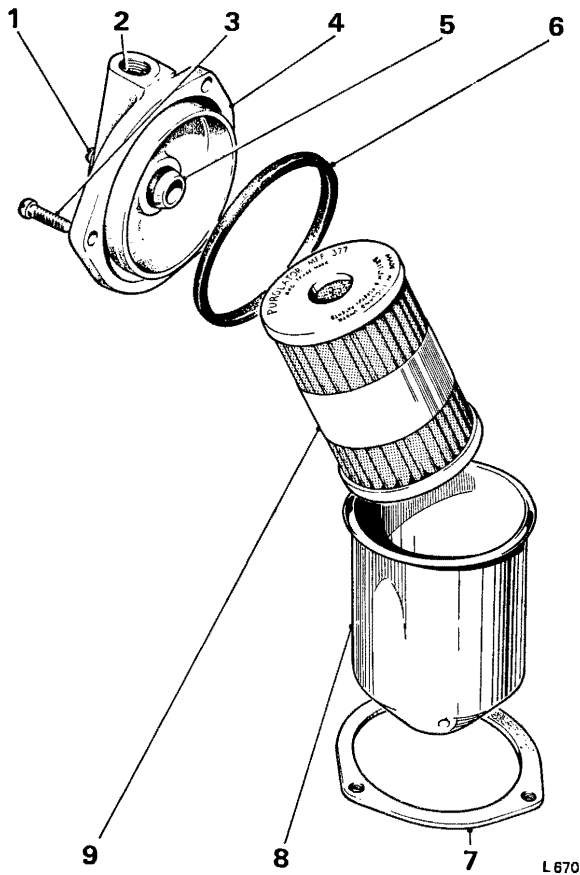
EXPLODED VIEW OF REAR FUEL FILTER
